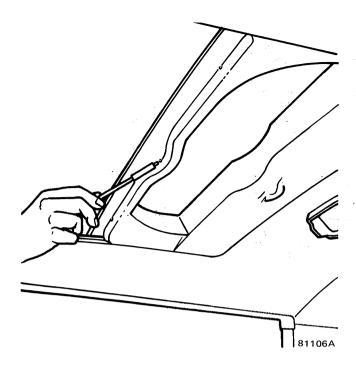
L-12 Removing/Installing Halo Assembly Attaching Screws
